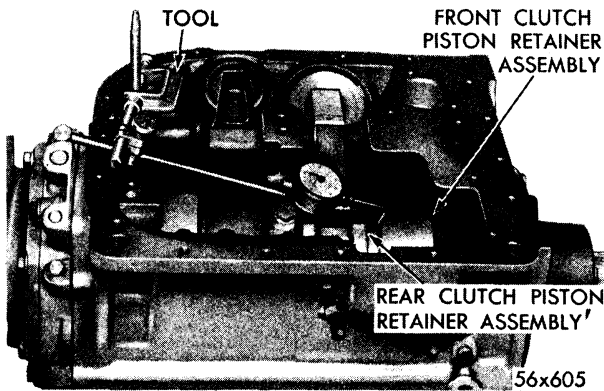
Checking Front Clutch Piston Retainer Assembly End Clearance
